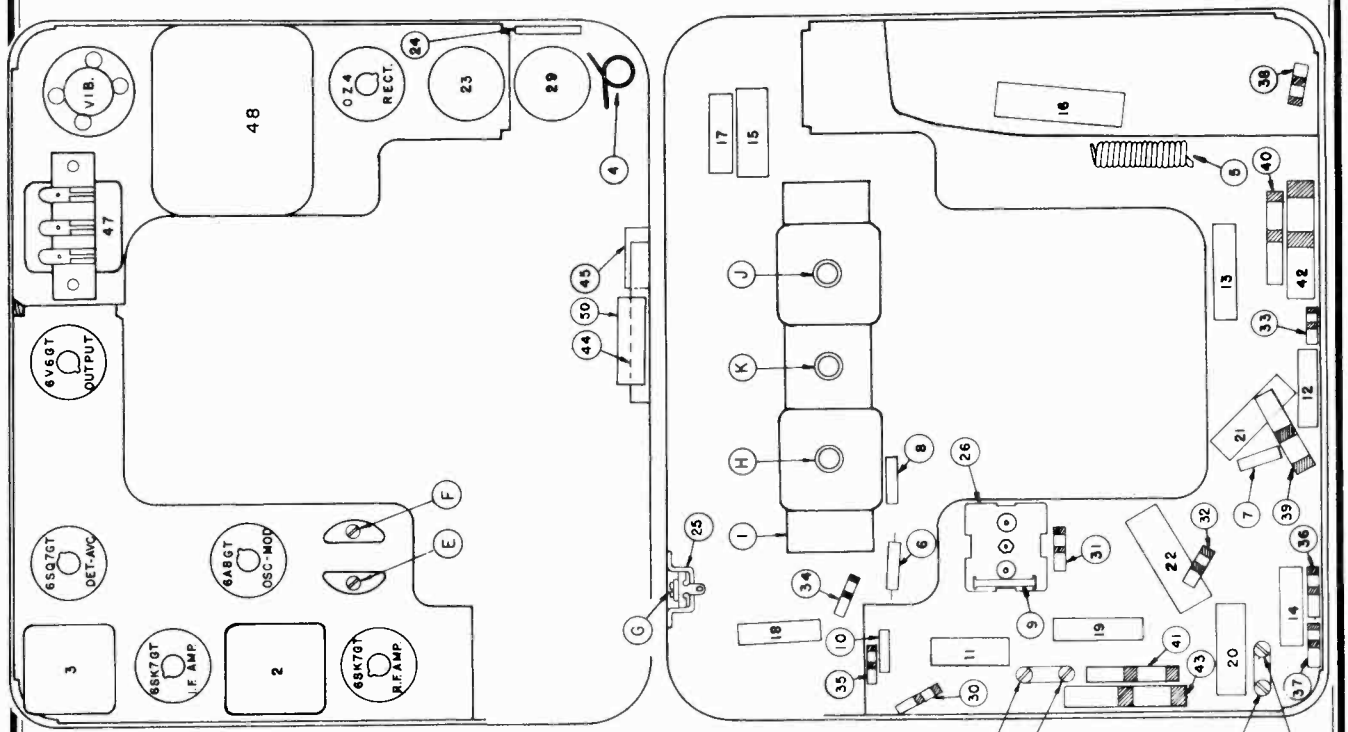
PARTS LOCATING DIAGRAMS (TOP AND BOTTOM VIEWS)
